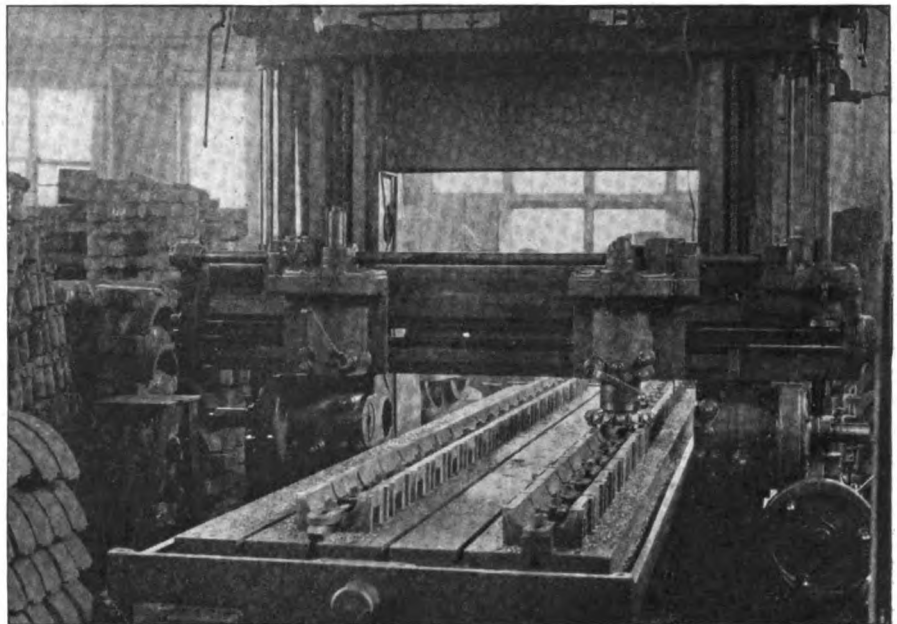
MILLING 40 AIR PUMP BEARINGS AT ONE SETTING ON A LARGE HORIZONTAL MILLING MACHINE
